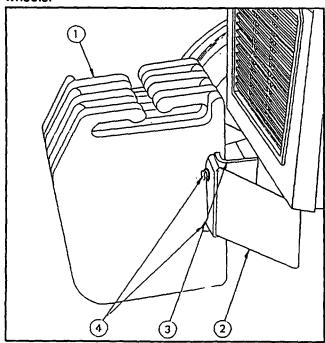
Front End Weights 1. Front Weights 2. Carrier 3. Retaining Clip 4. Bolt
